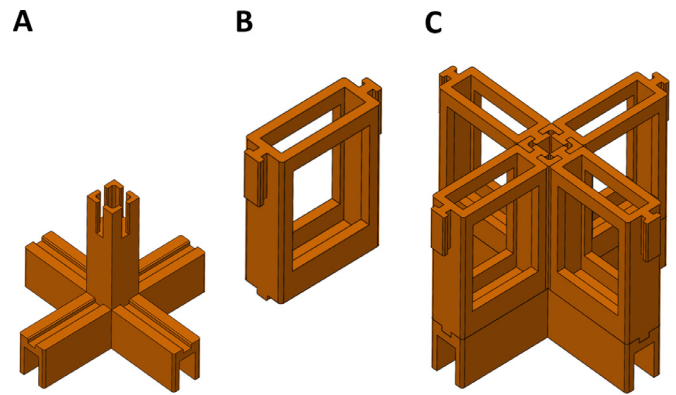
3D CAD model of the sample-holder components. (A) Cross-shaped base with central shaft. (B) Rectangular frame with T-shaped flanges. (C) Assembled sample-holder.
